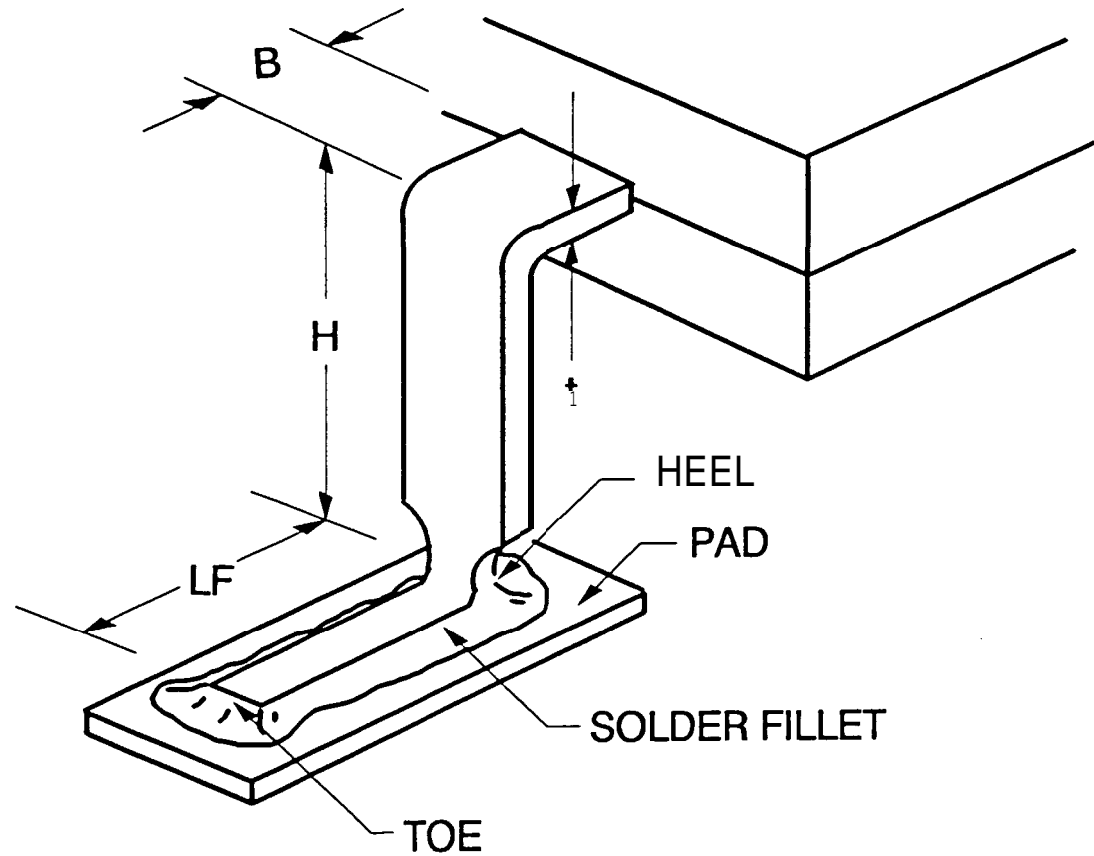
Schematic of finite element elastic-plastic-creep model of solder joint with gull-wing lead.
